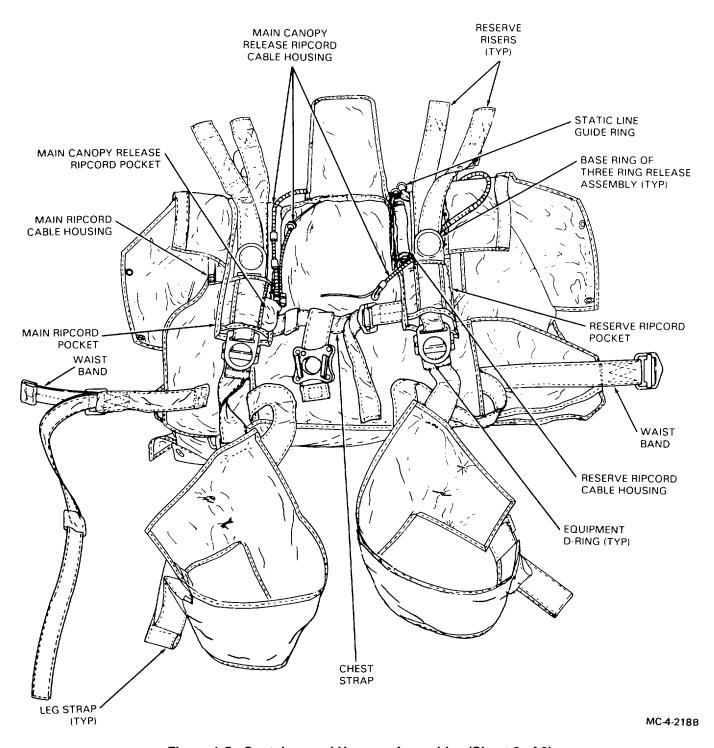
Container and Harness Assembly. (Sheet 2 of 2)
